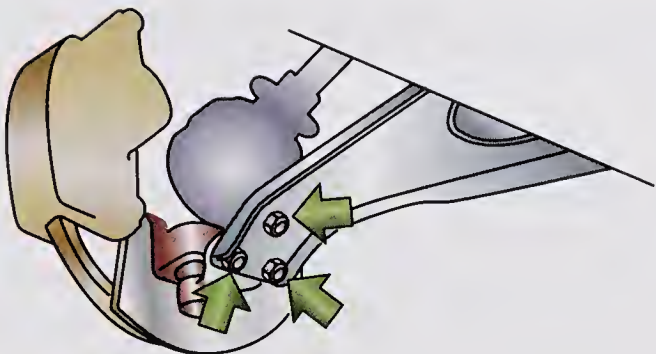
Removing the lower ball joint bolts and nuts from the lower control arm.
